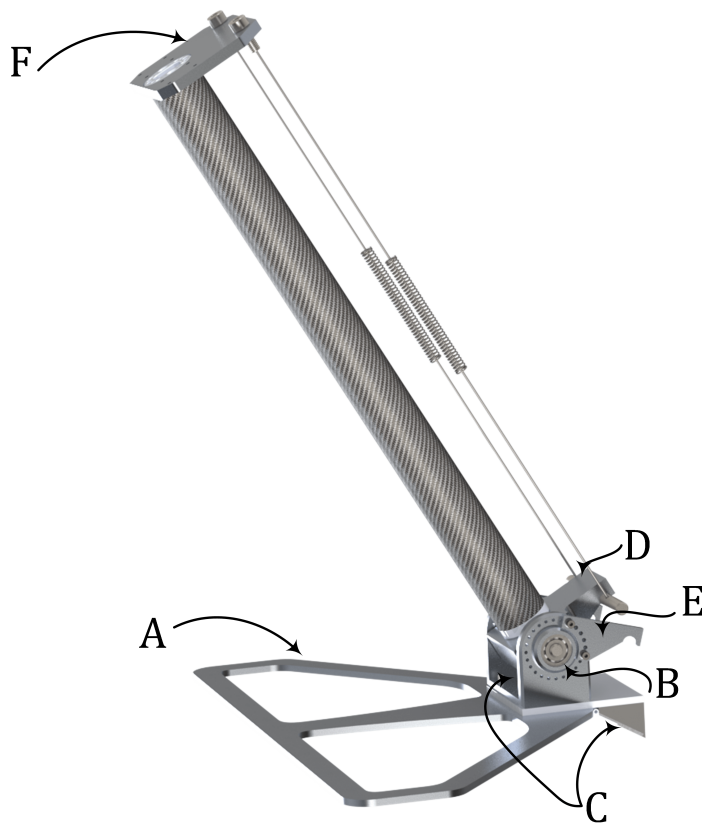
Prototype design of the soleus (Note: in the current “engaged” position, the dowel pin connection should be to Bracket E not D).
